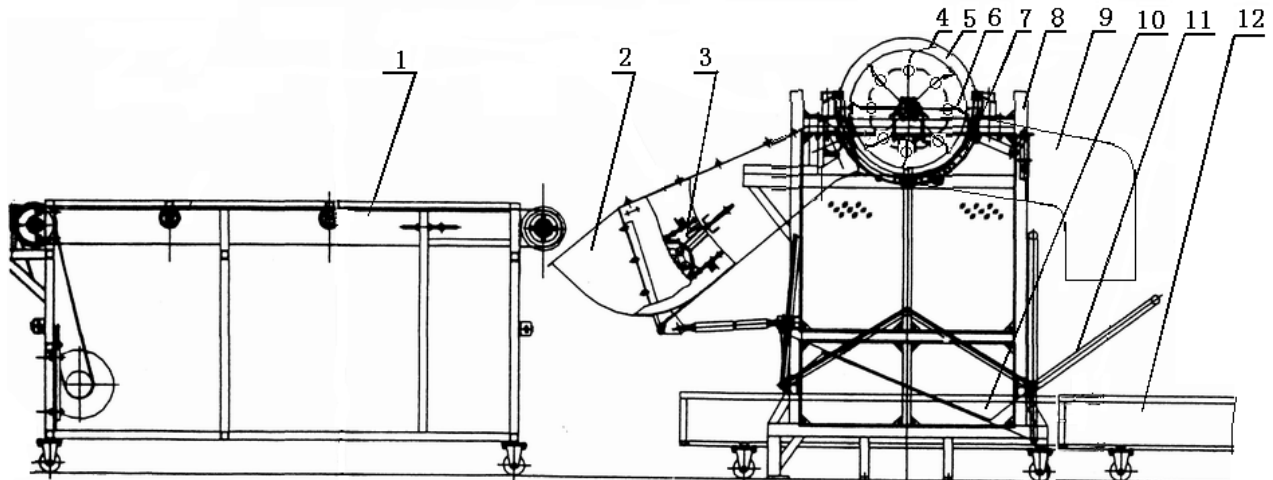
Schematic on testing equipment of axial threshing unit. 1, stripped mixture conveyor; 2, intakes; 3, feeding chain; 4, swath deflector; 5, threshing drum cover; 6, threshing drum; 7, separation concave; 8, frame; 9, straw outtake; 10, grain box; 11, valve handle; 12 straw boxes.
